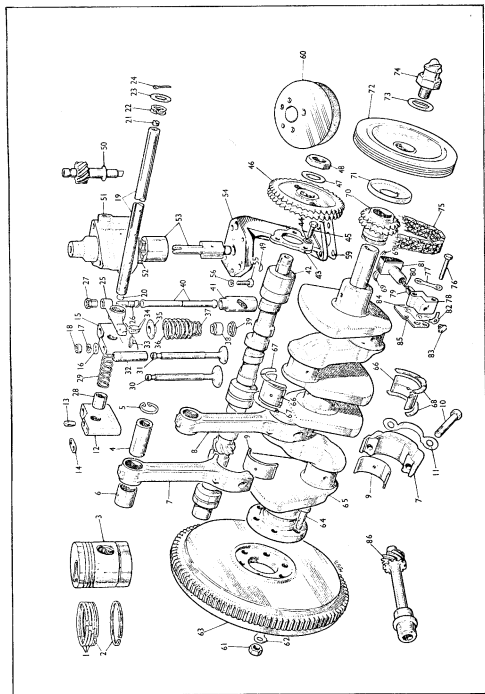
· 1.5 LITRE DIESEL ENGINE CRANKSHAFT - CAMSHAFT ASSEMBLIES
